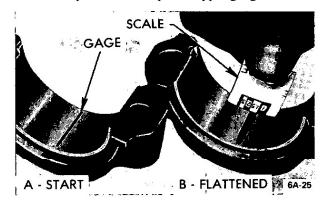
A-25 Checking Bearing Clearance With Plastic-Type Gauge
